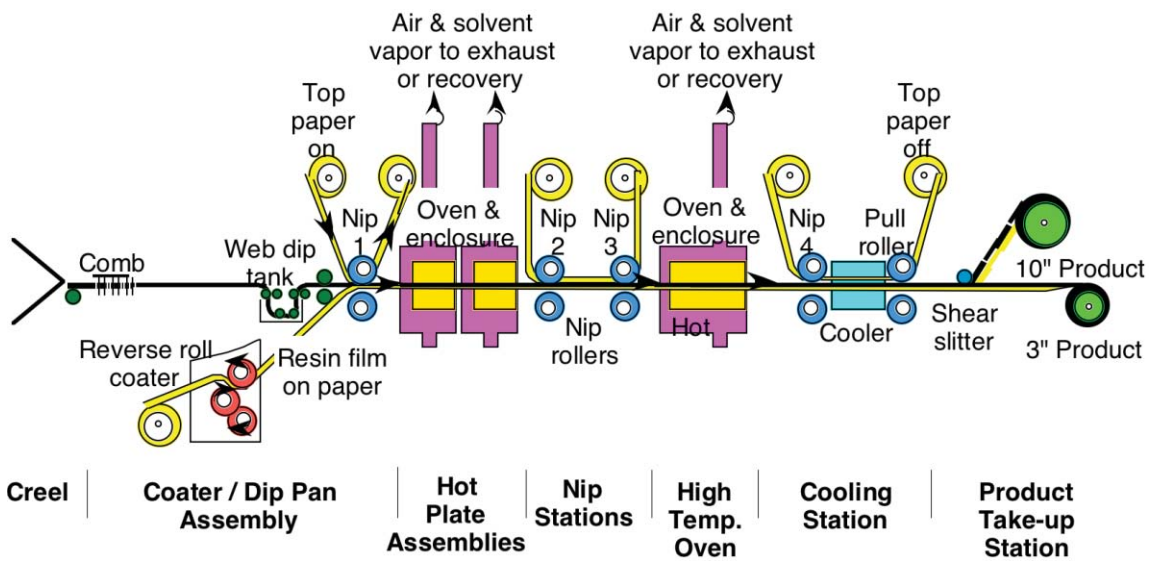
Schematic of LaRC multipurpose prepreg machine.
